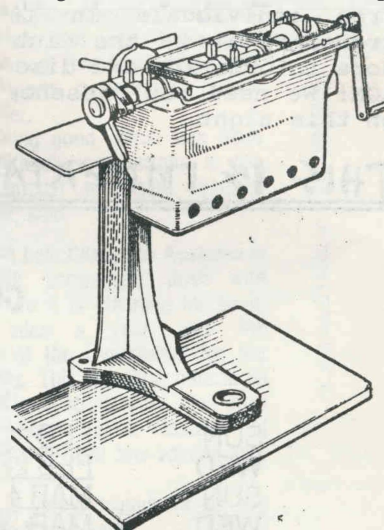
Boring the main bearings in line with a hand-operated boring bar. A V.C.L. engine stand is used to carry the engine.
